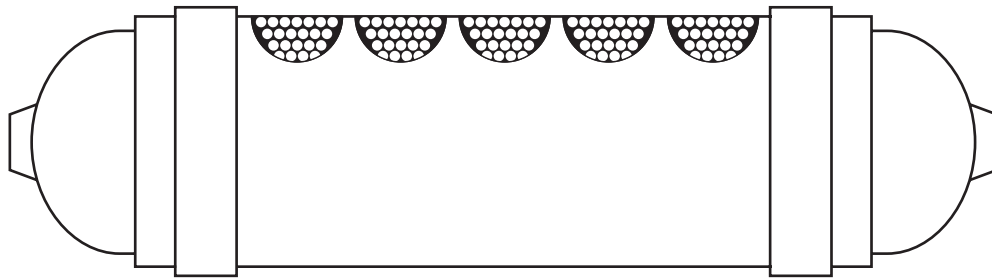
Container orientation and layout of exposure areas (See [17.3.3.2.1](#) and [17.3.3.2.3](#))
